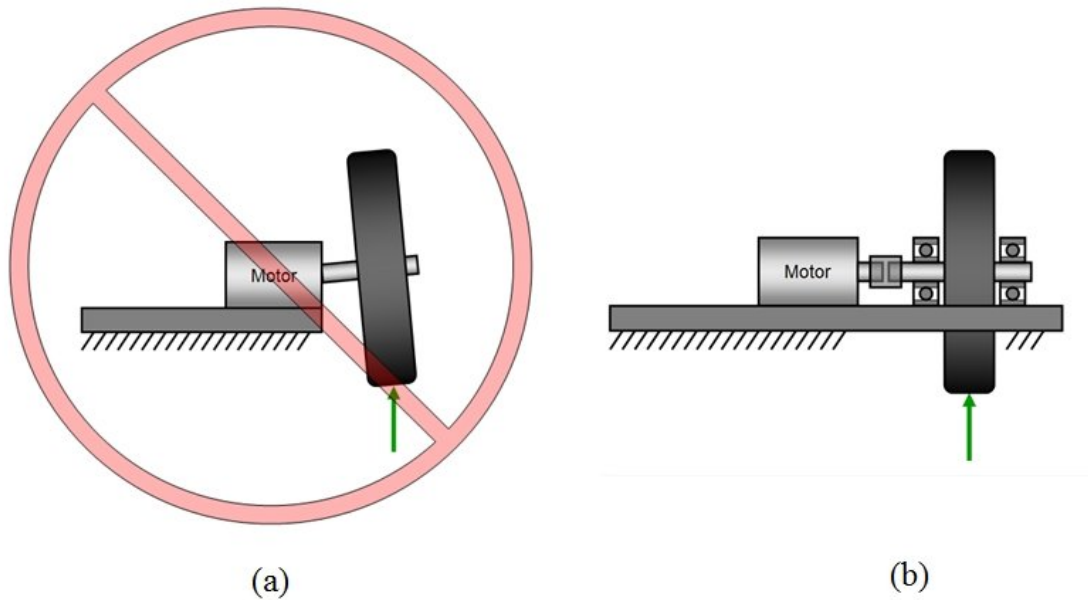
Motor shafts are generally not designed to take bending moments. A less risky configuration is to use separate bearings to support the load and allow the motor shaft to transmit only torque.
